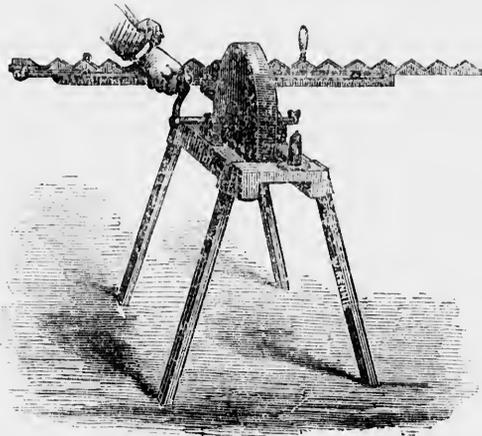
MOWING MACHINE KNIFE GRINDER. C-106201
